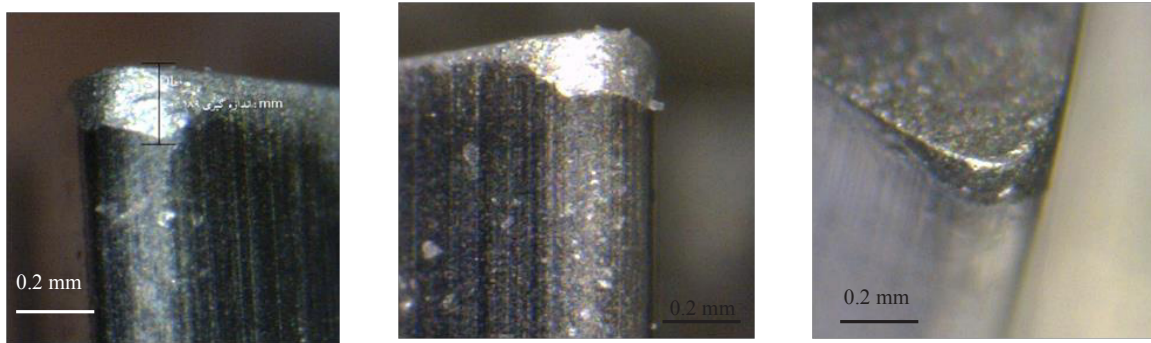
Extension of tool wears on both sides of tool cutting edge in incremental infeed method.
